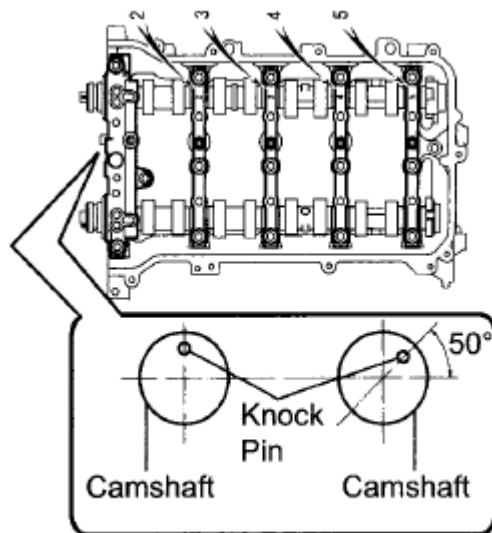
Identifying Numbers On Camshaft Bearing Caps
